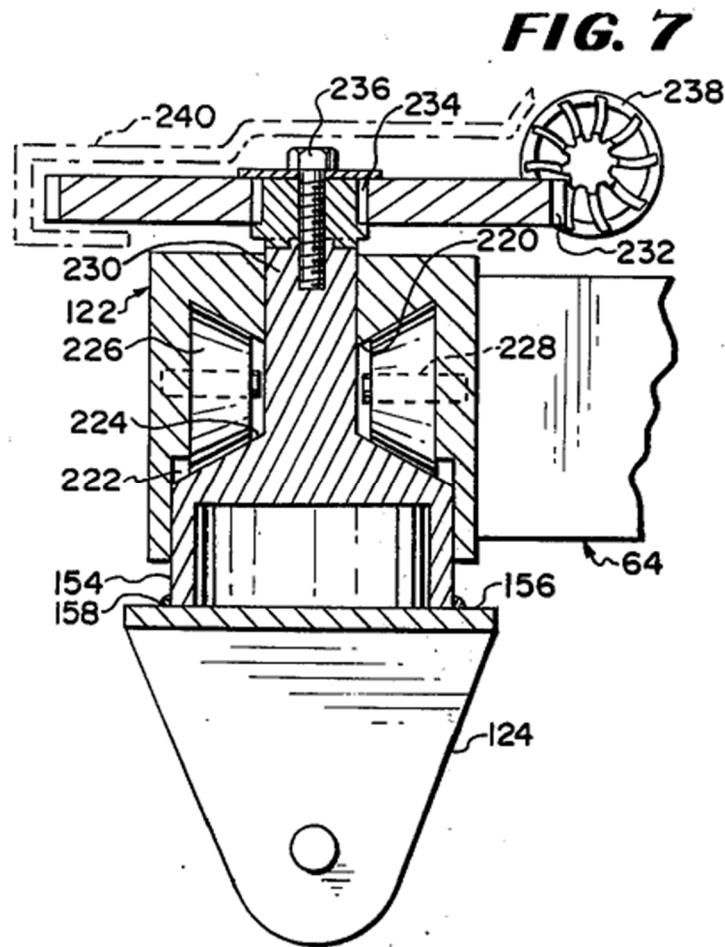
depicts “a cross-sectional view of a spindle-mount above a bogey-mount for a ground engagement means and a pinion gear assembly for 360° steering.” Ex. 1009, 2:51–53. Steering housing 122 includes conical bearing surfaces 220 within base 154, which is attached to bogey-mount 124. *Id.* at 7:37–42. Base 154 includes conical bearing surface 224 to contain tapered roller bearings 226. *Id.* at 7:42–45. Driven gear 232 is driven by drive pinion gear 238, with a drive motor, mounted walking beam 64, driving pinion gear 238. *Id.* at 7:46–51. Figure 7 depicts components of a rotary actuator positioned physically between the crawler track and jacking column.
